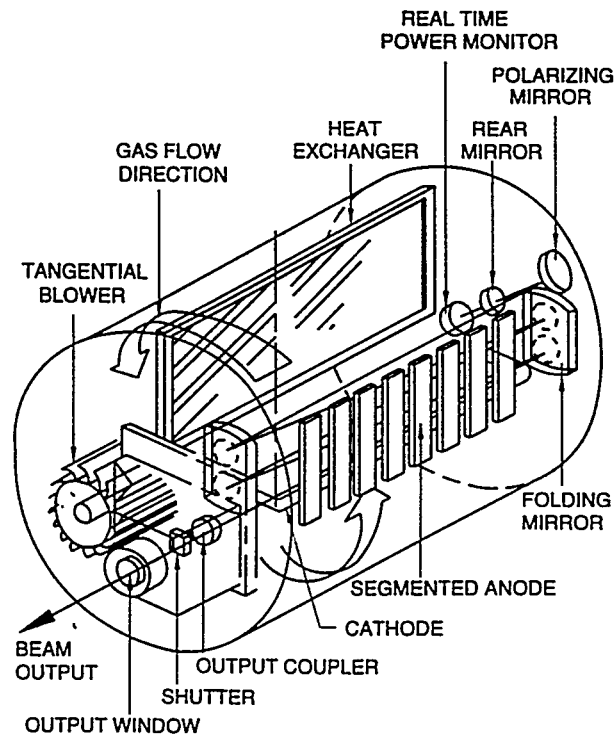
Typical Arrangement of Components of a Transverse Flow Carbon Dioxide Laser from AWS Welding Handbook, Vol 2, American Welding Society, 1991
